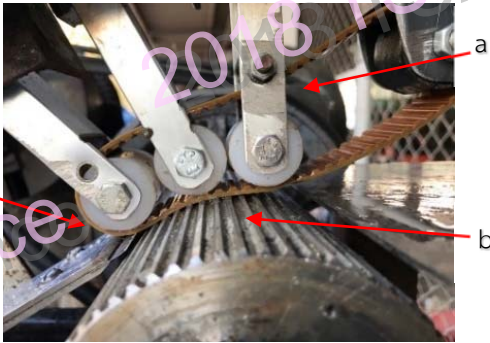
pickling mango piece peeling mechanism a) upper roller set, b) lower roller, c) peeler
